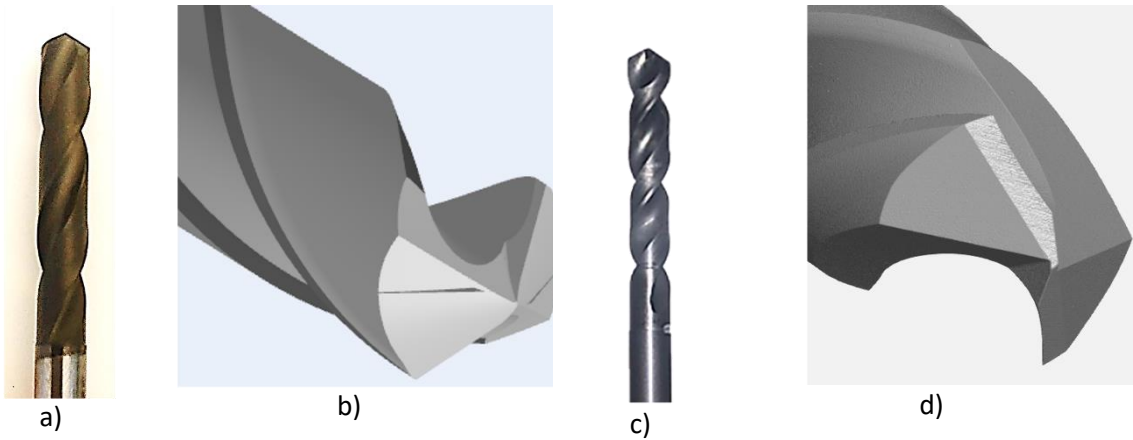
One-shot drilling tool geometries used in the present study: type N geometry (drill 1) (a) and respective drill tip illustration scheme (b); type W geometry (drill 2) (c) and respective drill tip illustration scheme (d).
